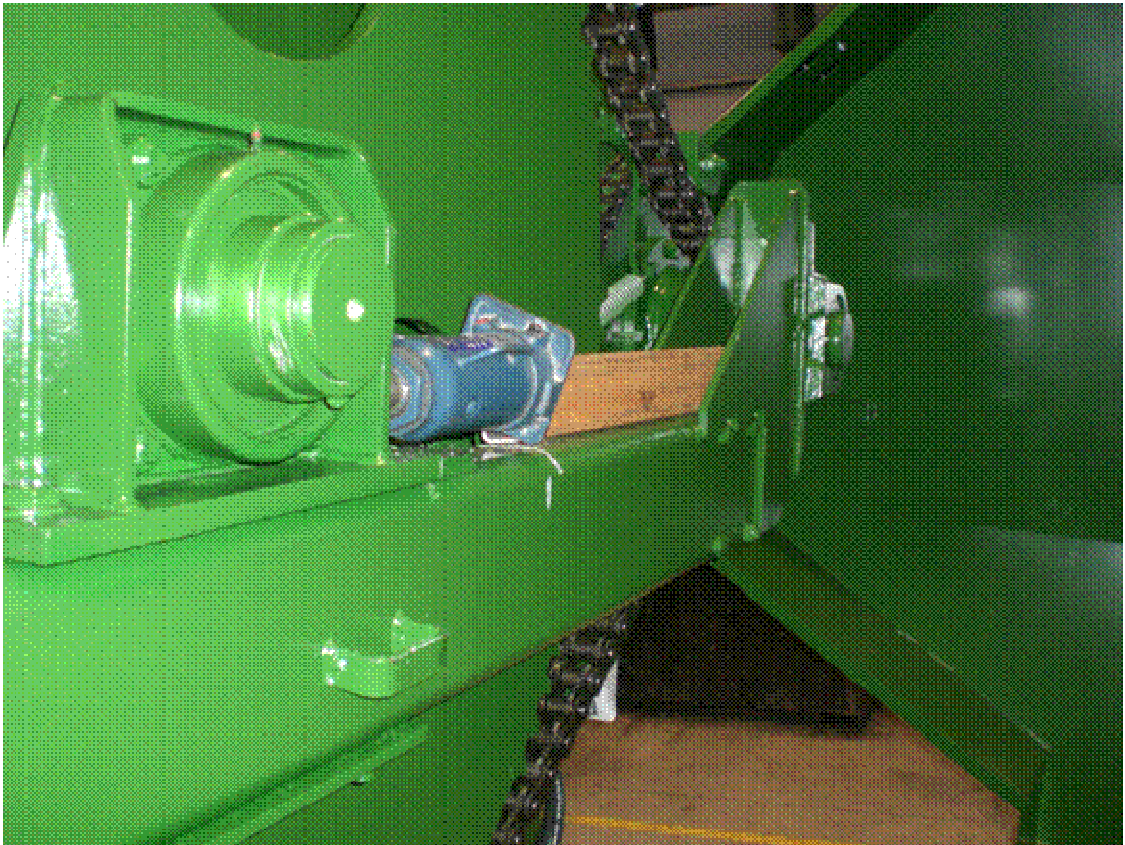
showing adjustment method of rotor position . It will be necessary to weld a stop in place when rotor is placed in correct position .
